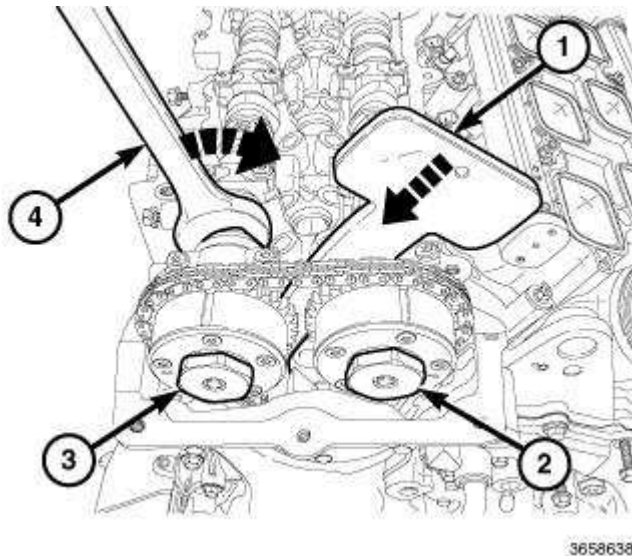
Compressing Tensioner By Slightly Rotating Exhaust Camshaft Clockwise
